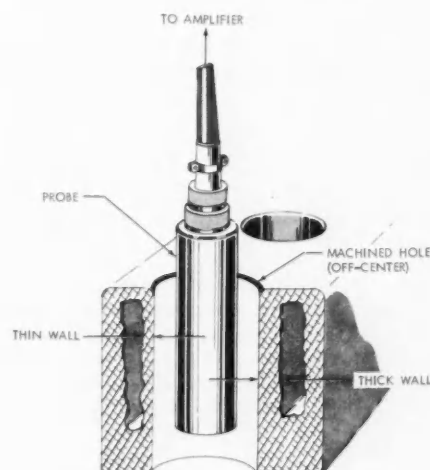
The concentricity of a hole bored in an engine block or similar casting can be measured by a collimated focus at right angle to axis.
